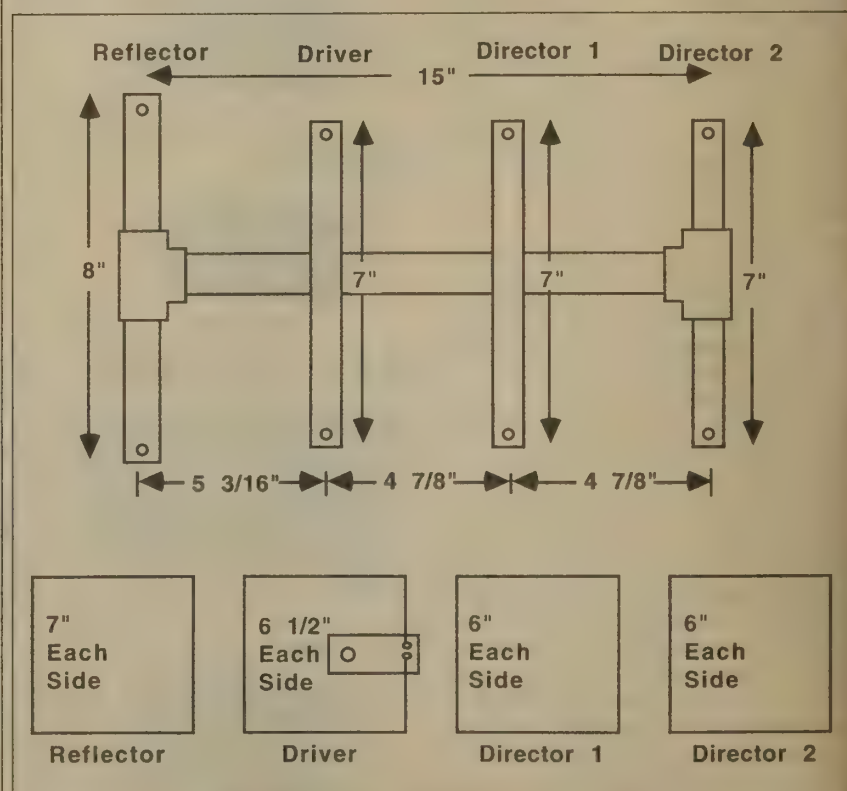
Boom dimensions (top) and element dimensions (bottom) for the four-element 70cm quad.
